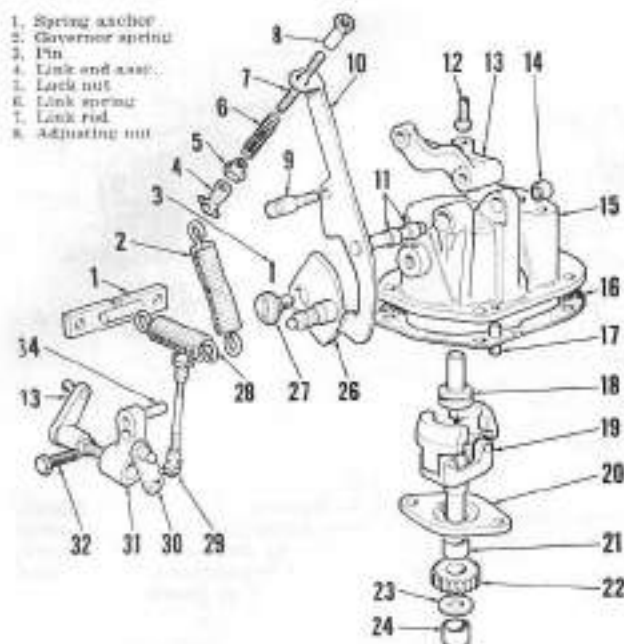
Exploded view of governor assembly. Adjusting screw (12) (see also C-Fig. 73) contacts weight plunger (18) which extends up through the housing (15). Governor gear (22) is driven from gear (40—Fig. 76) on distributor drive shaft.
